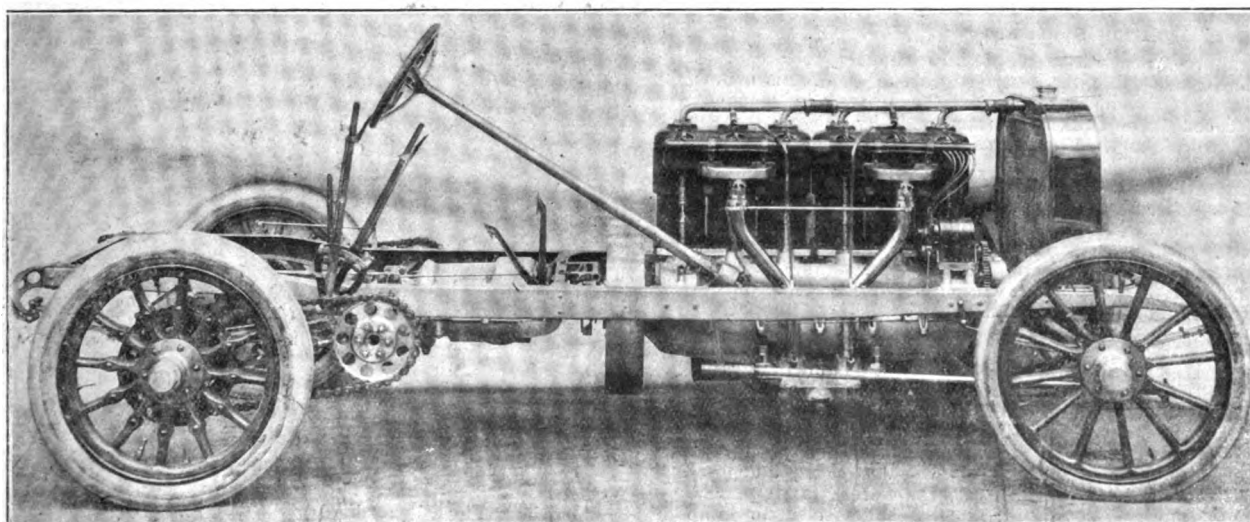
Chassis of the Cottareau 160-h.p. Six-Cylinder Racer.
